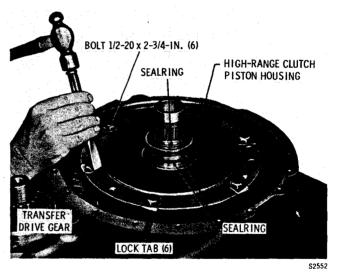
Flattening piston housing bolt tabs (TTB 2221-1, 2421-1)
